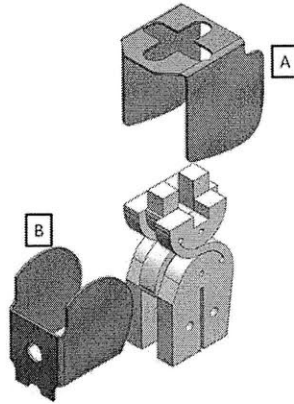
Exploded view of a Squishbot1 active joint. Locking plate A attaches to the top cylinder and remains stationary, while plate B rotates with the bottom cylinder. Soldering the two plates together locks the joint.
